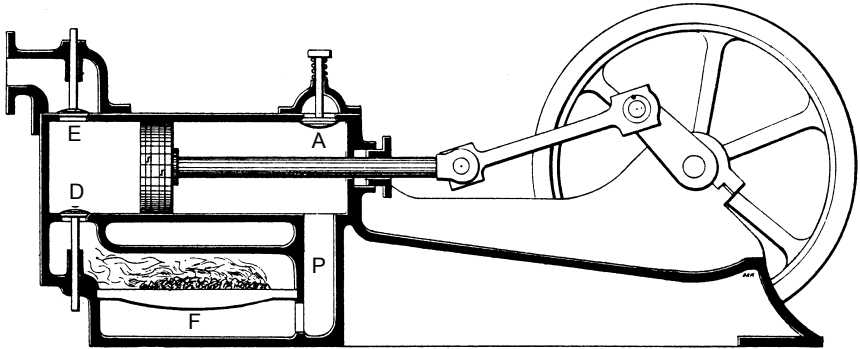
A 'gradual combustion engine' with double-acting piston and integral furnace and cylinder assembly. Built in 1880 and used for water pumping. After Kennedy (1904-5)
